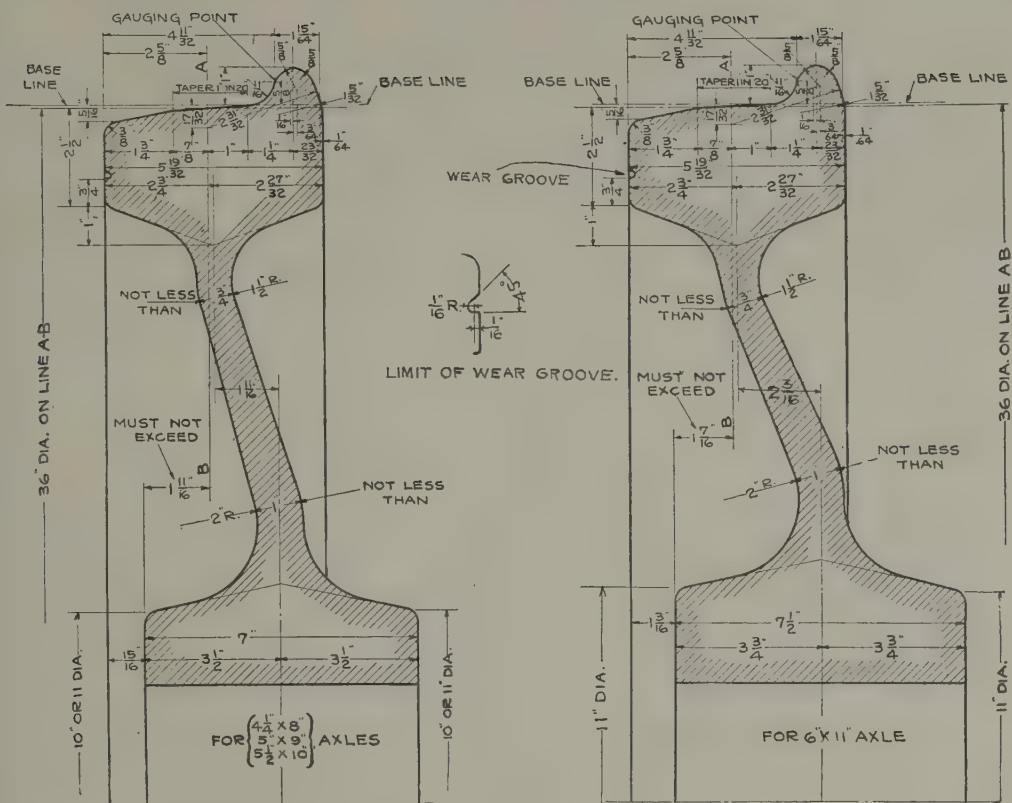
Standard 36 in. Wrought Steel Wheel. (M. C. B. Sheet 25A.)
